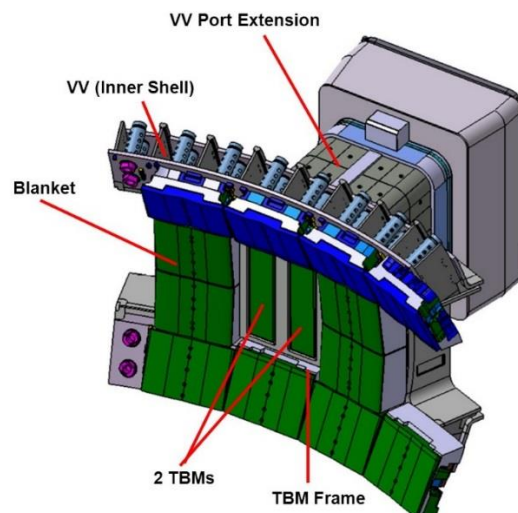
Shielding blanket and Test Blanket Modules (TBMs) for ITER [8].
